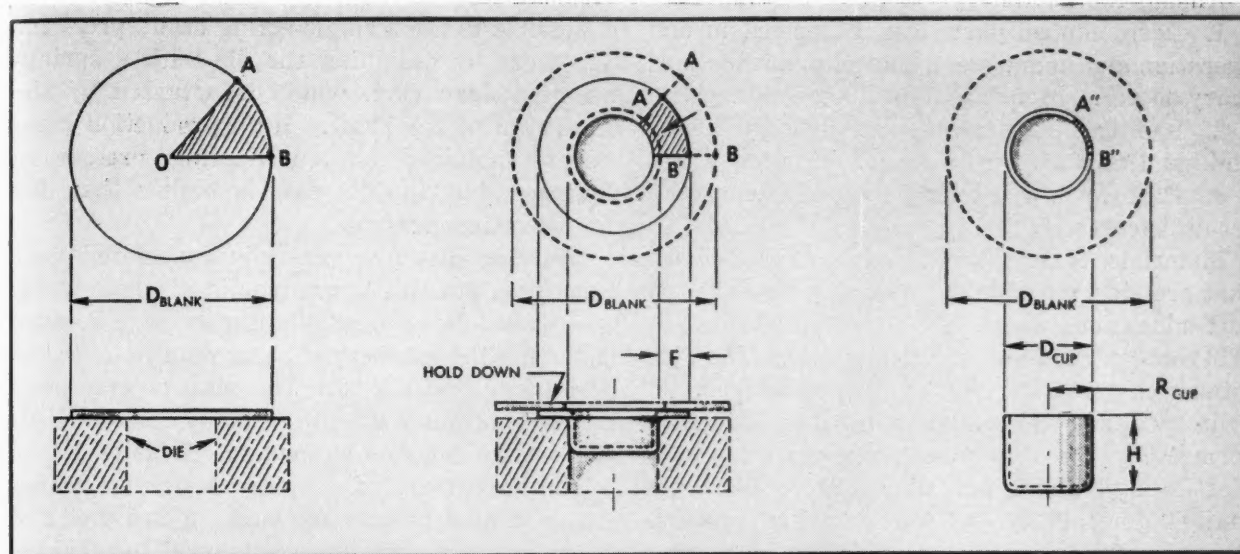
Diagrammatic representation of basic drawing process, illustrating shortening of arc length (AB) on the original blank to (A'B') in the intermediate stage and to (A''B'') in the completed cup
